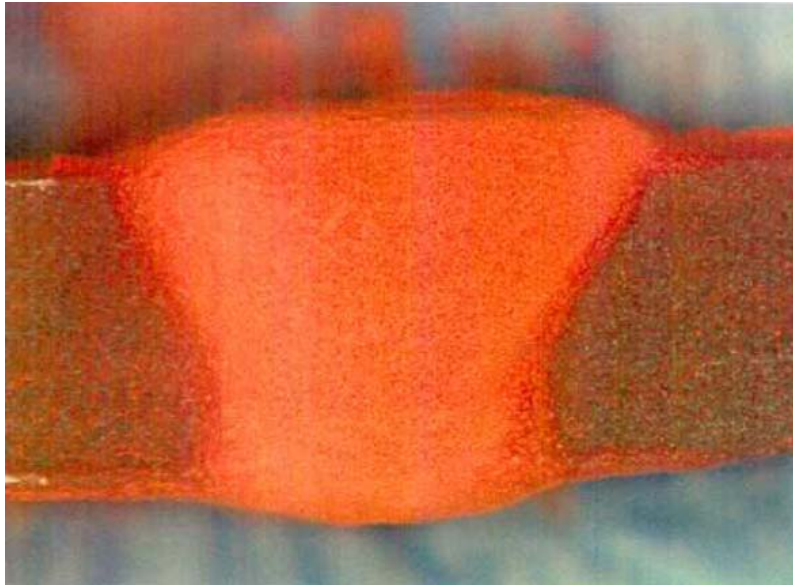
Weld Metal – Fully Anodic.
